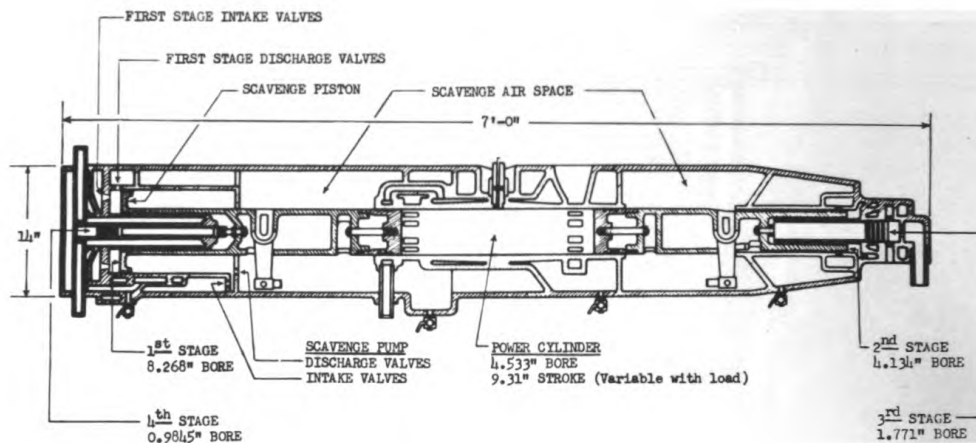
Further details of the free-piston engine pictured in Figure 2. The essential simplicity of the machine can be demonstrated by comparing its few parts to the more numerous ones required in an automobile engine.
